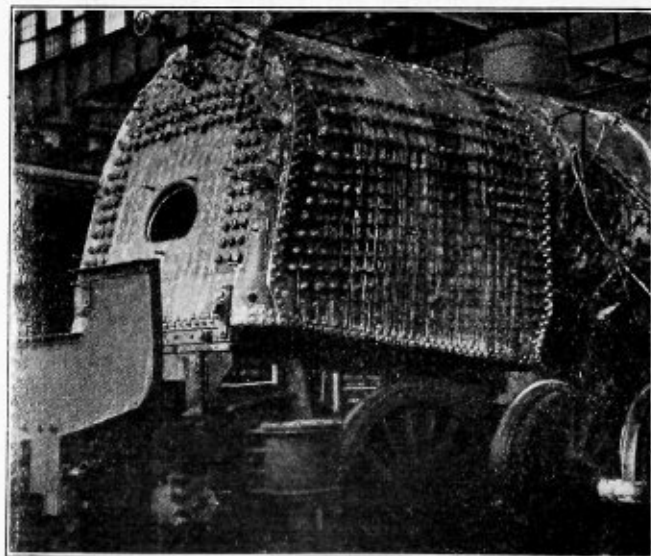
View of Boiler with New Firebox Applied to the Back End
